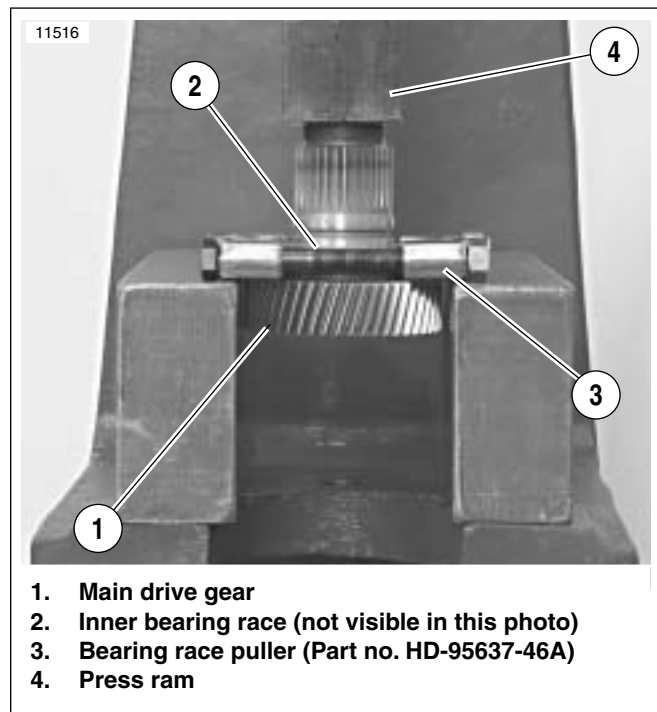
Removing Inner Bearing Race From Main Drive Gear
